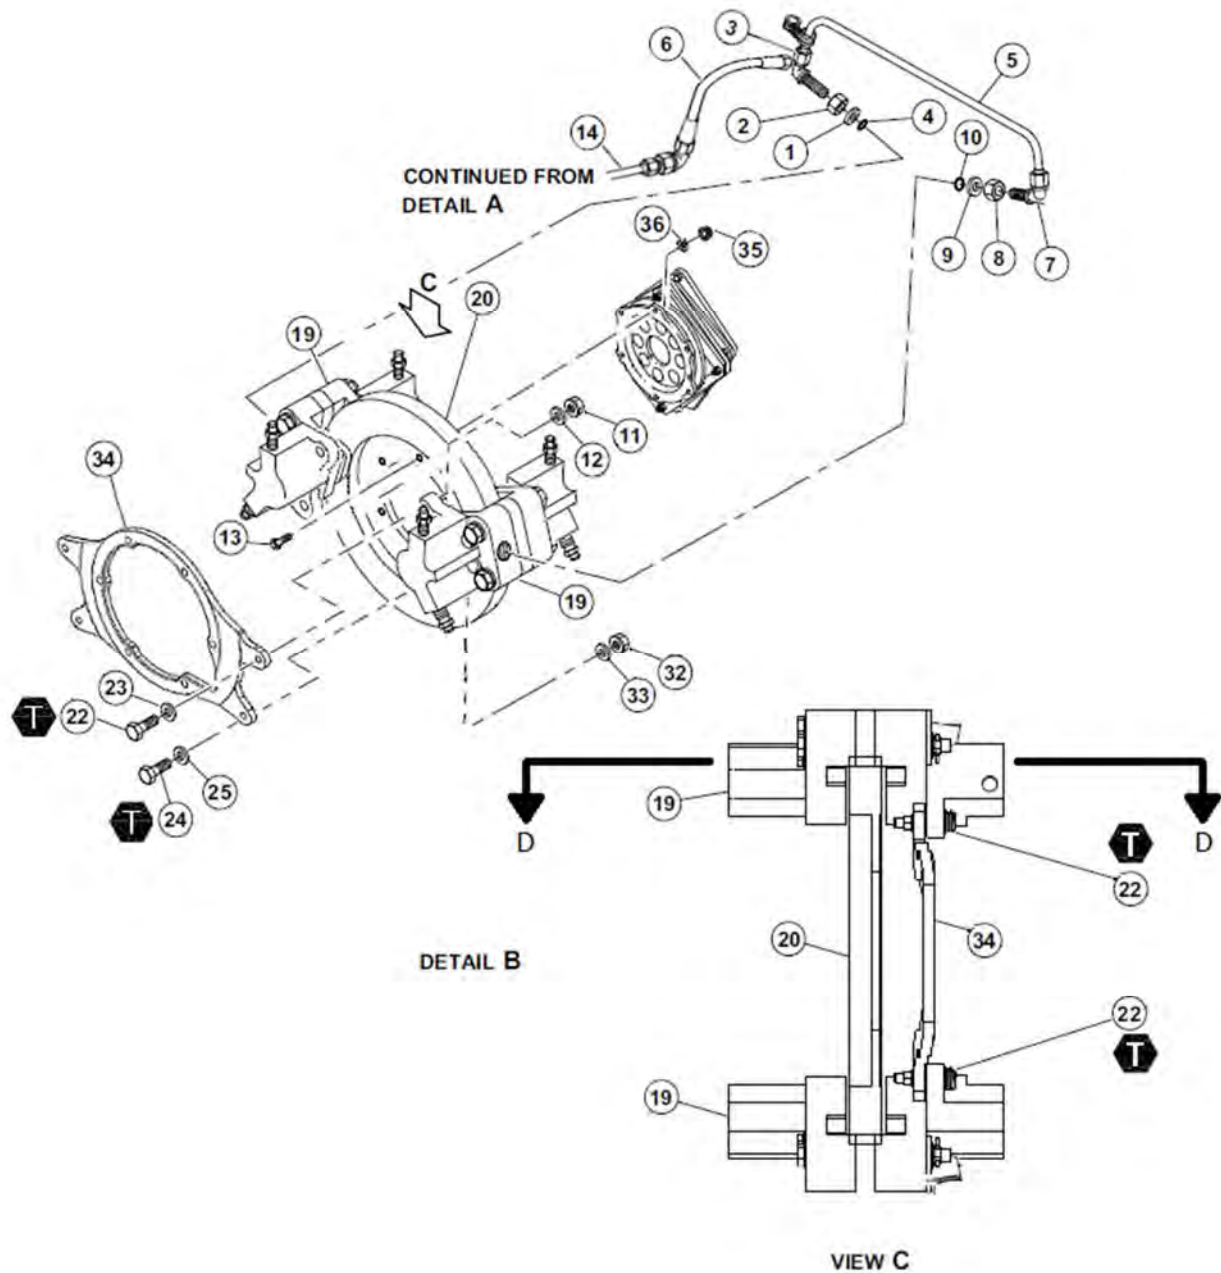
Rotor Brake System – Removal/Installation (Sheet 2 of 4)
